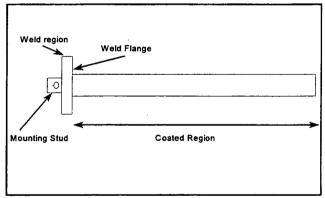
Aluminum Electrode for Sulfur Core Sodium Sulfur Battery. Shaft Length = 10 cm, Diam. 1.25 cm.
